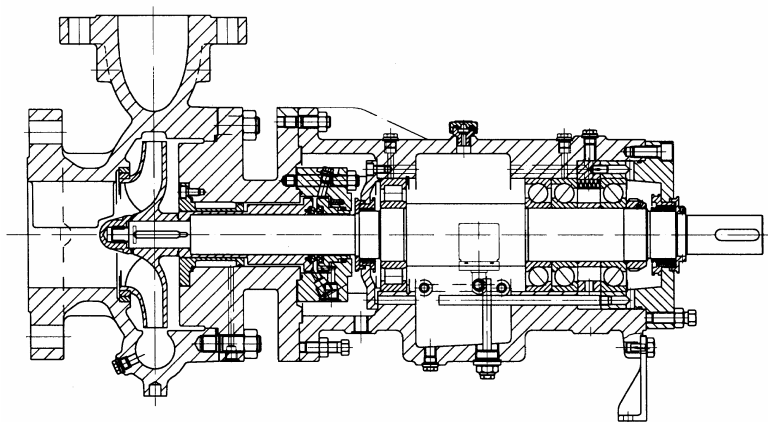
Pump with cooling sleeve and cooled mechanical seal.
